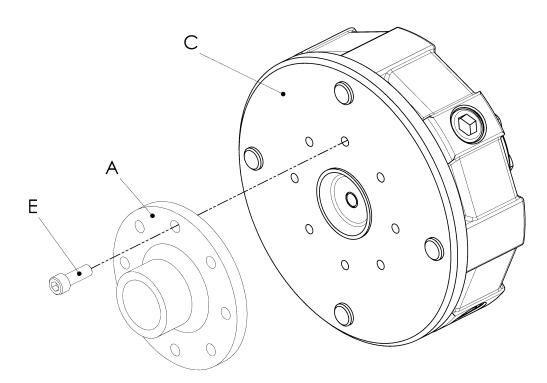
Screwing together the coupling and the transmission flange (A) using the screws (E)
